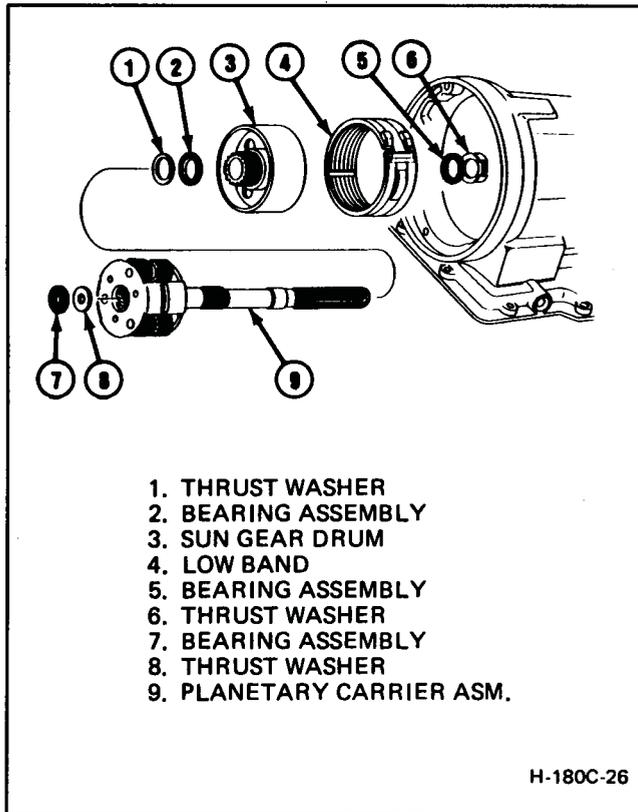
C-27 Installing Low Band, Sun Gear Drum, and Planetary Carrier
